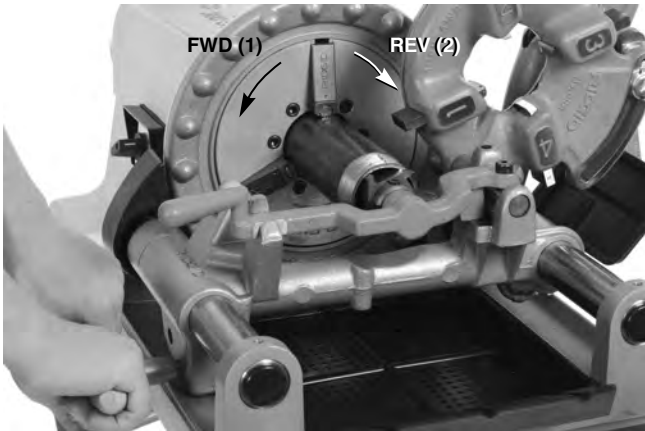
Reaming Pipe with Reamer, Machine Rotation
